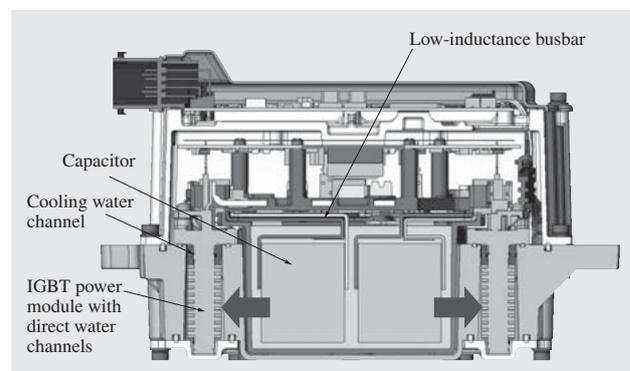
Internal Design of Inverter Using Power Module with Double-sided Direct Cooling.
